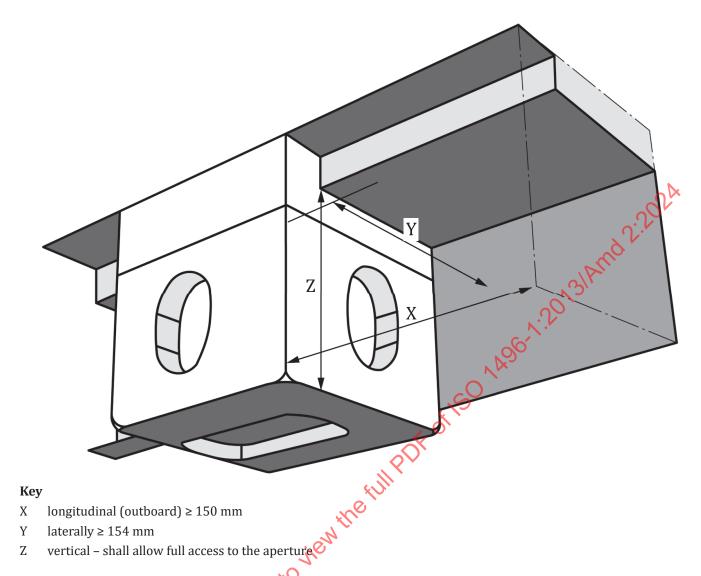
Lower intermediate fitting recess for a 45-foot container
